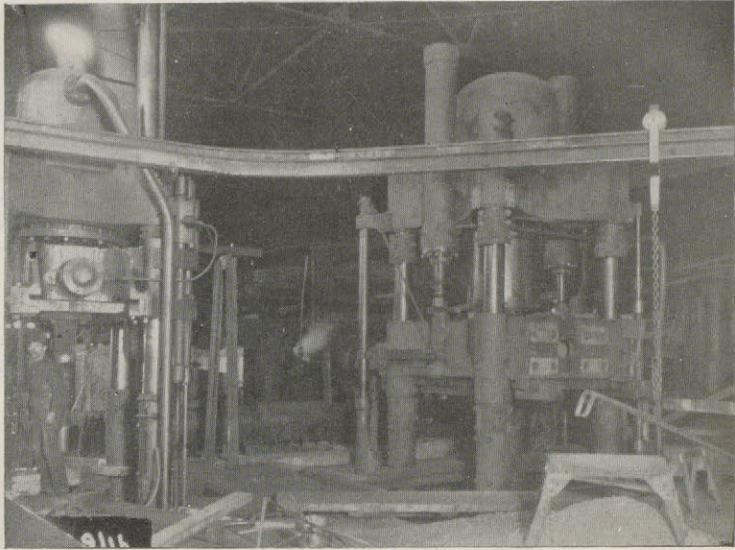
Nova Scotia Steel Co. Forging Plant.
